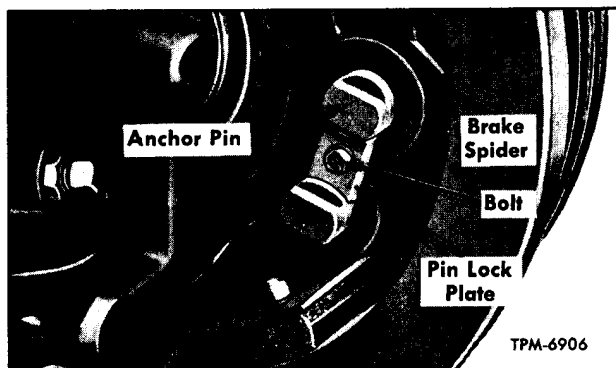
Front Brake Shoe Anchor Pins Installed (Typical)
